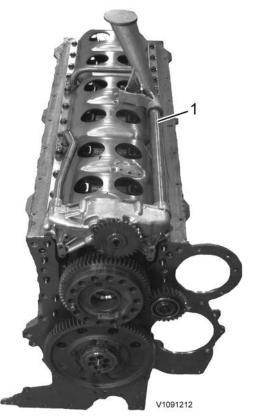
1 Pipe with strainer 28 Install the ladder frame and the pipes for the oil pump. Tightening torques, see *Cylinder block, tightening torques page 18*.
